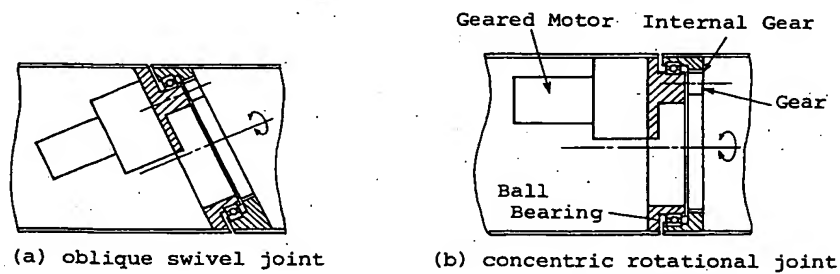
Design example of the joint mechanism for oblique swivel mechanism
